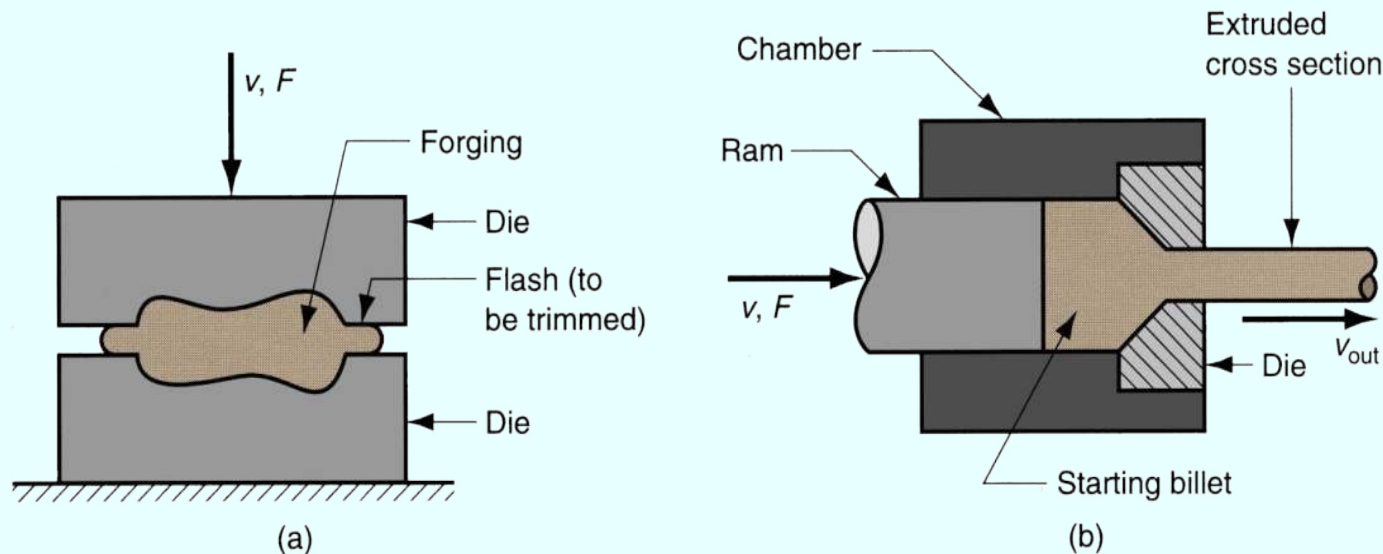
Some common deformation processes: (a) forging and (b) extrusion
